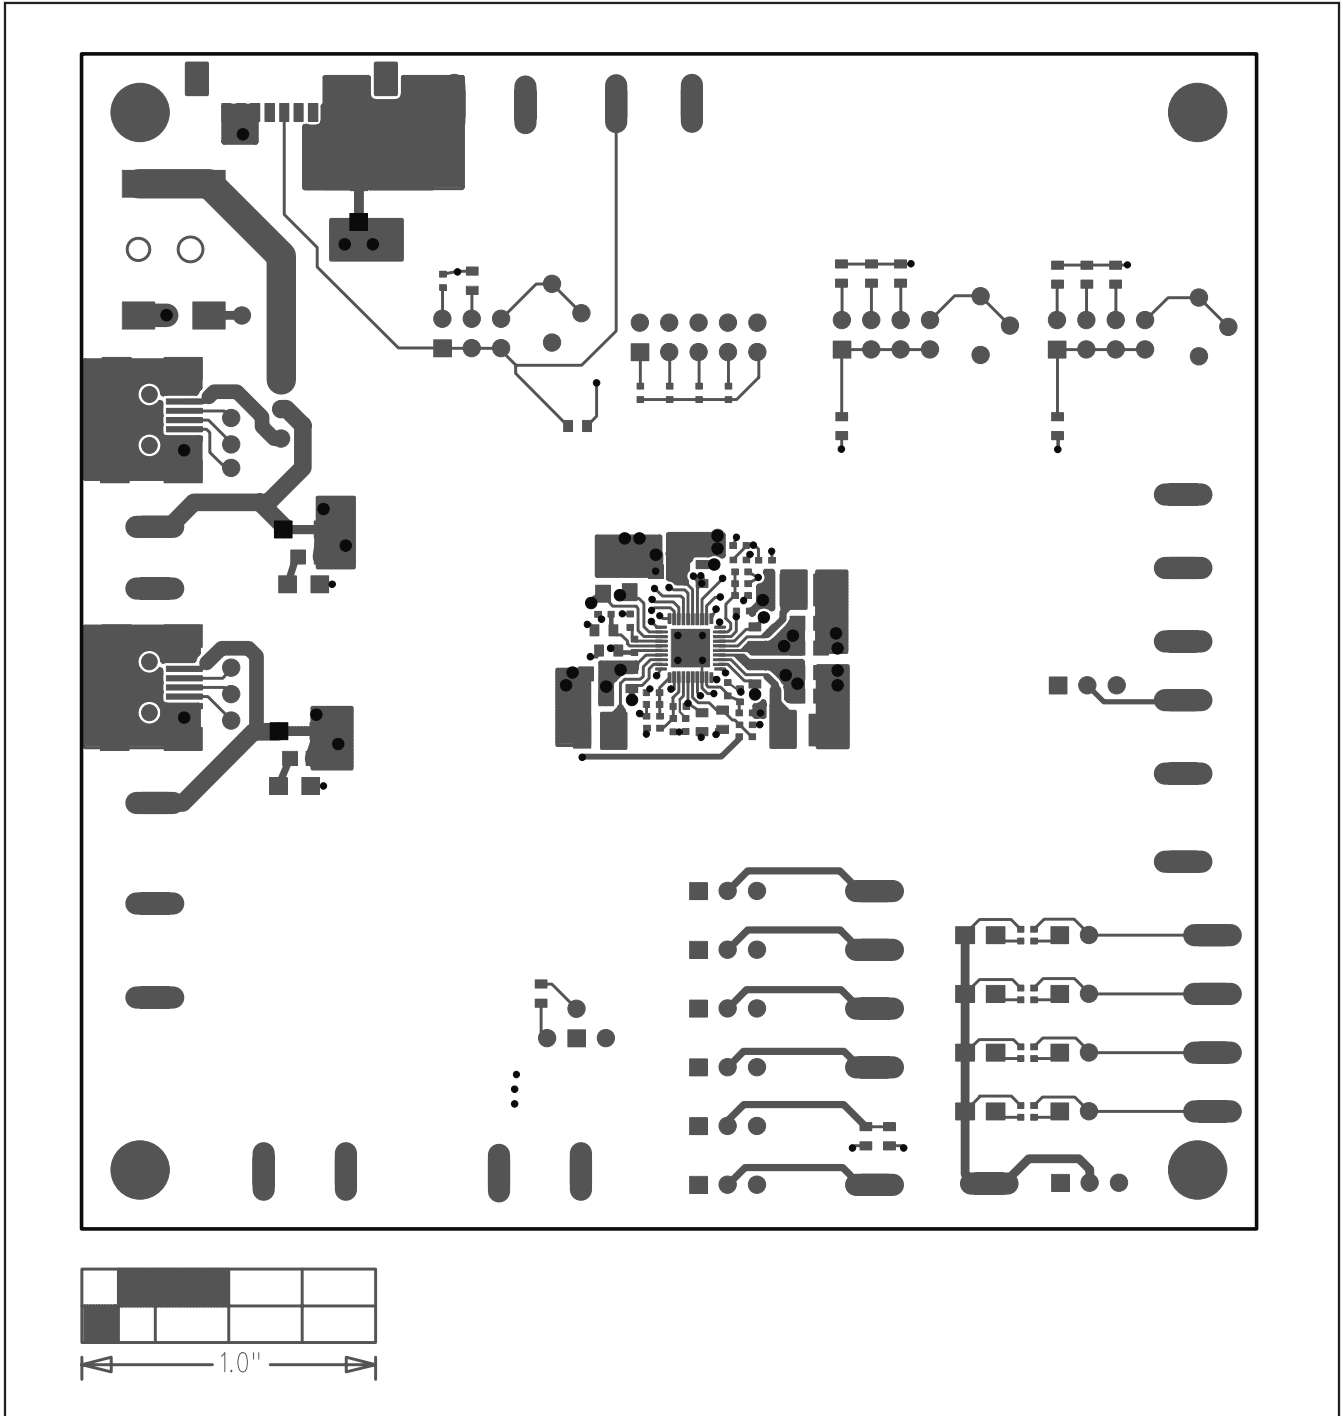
MAX8671 EV Kit PCB Layout—Component Layer 1
